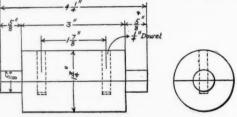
and 39. Casting and Split Pattern for Recessed Cylinder.
